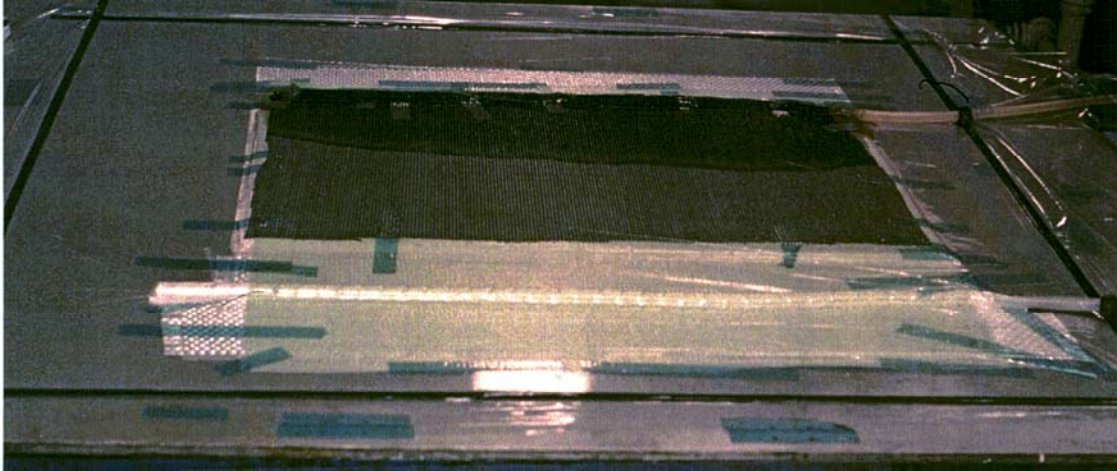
The assembly is then vacuum bagged and infused with resin.
